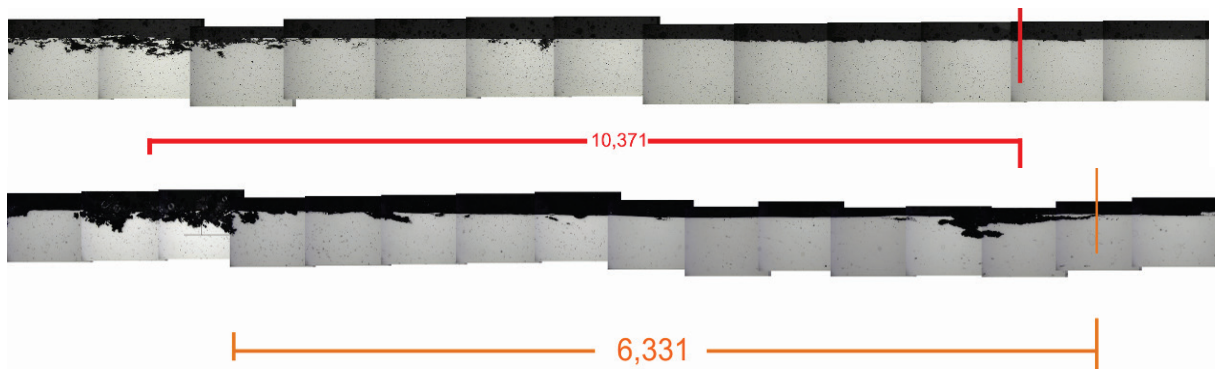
Metallographic transversal cross sections of the advancing sides of dissimilar FSW 2024A/6056 joints after 216 h immersion in chloride-peroxide solution, (top) in as welded and (below) PWHT condition
